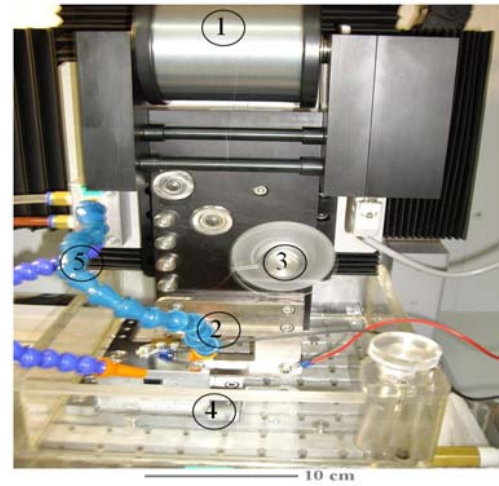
Experimental setup of micro WEDM (DT110, Mikrottools Inc., Singapore). (Legend: 1. wire electrode supply spool, 2. workpiece and clamping device, 3. used wire collector spool, 4. dielectric tank, and 5. dielectric supply nozzle)
